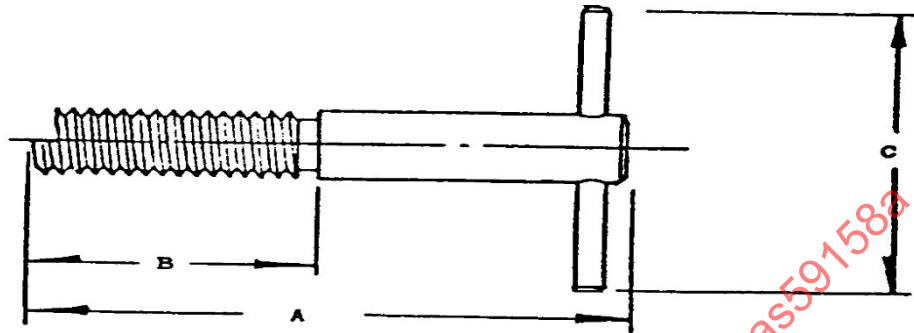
Type III, Class 2, Style b mandrel inserting tool for 9/16 (0.5625) and larger unified coarse threads
